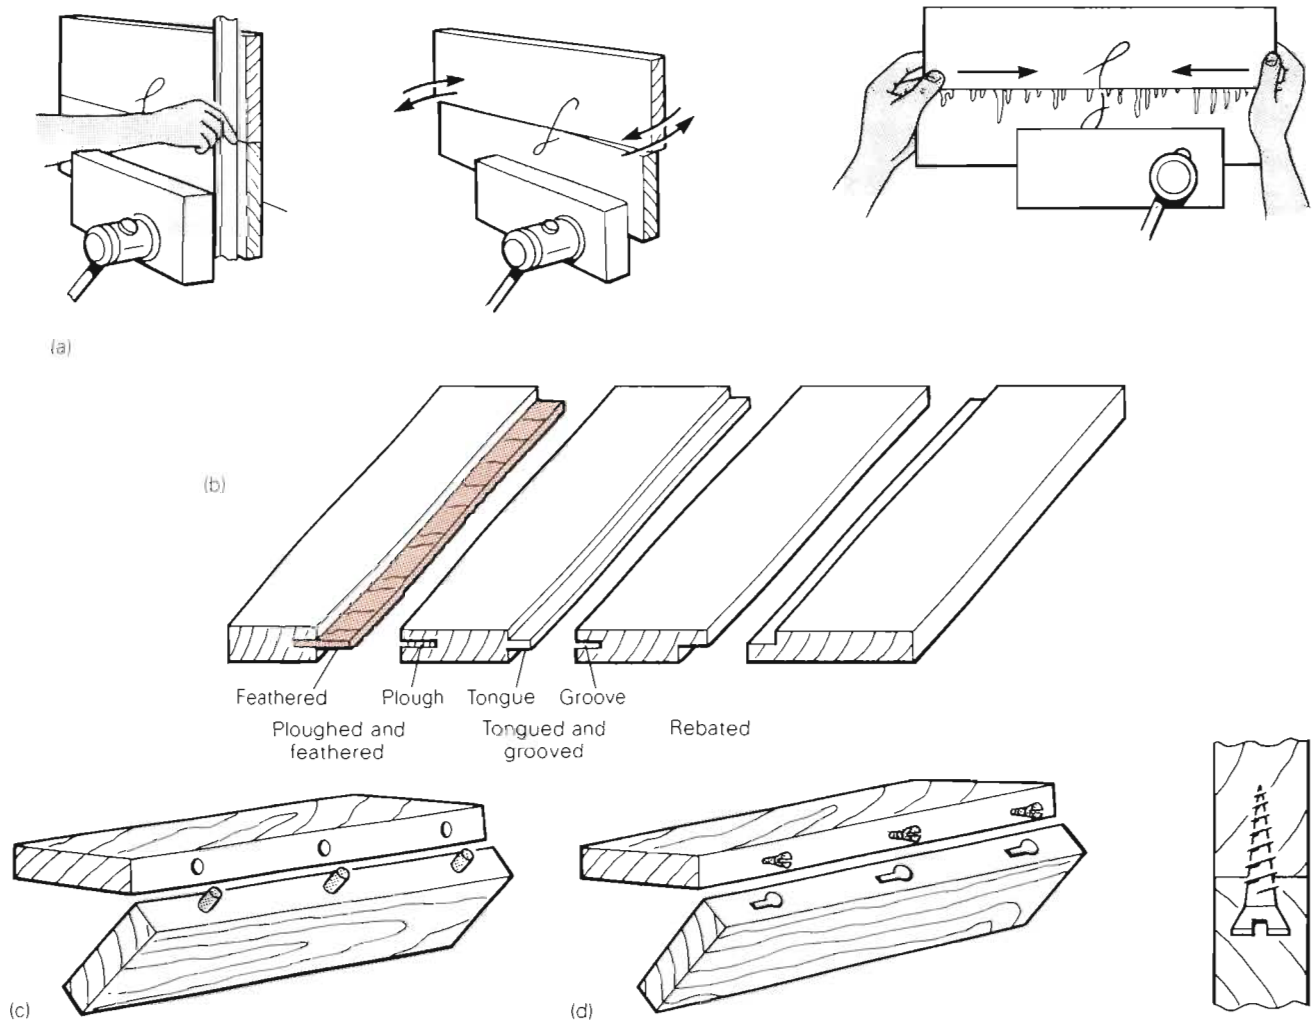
Widening joints: (a) butt joint, (b) tongued joints, (c) dowelled joint, (d) slot-screw joint.
